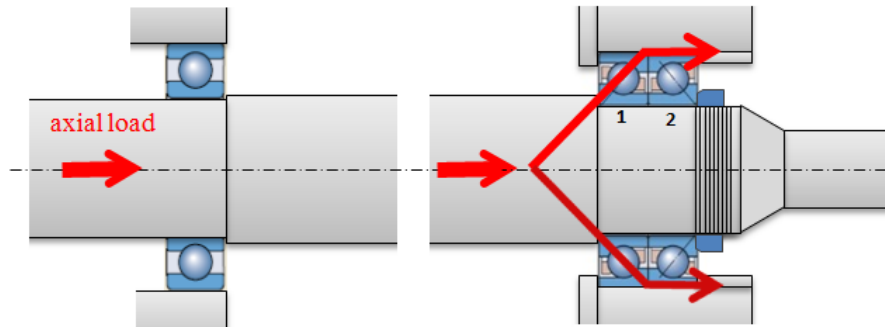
Bearing system with a radial bearing and two angular bearings.
